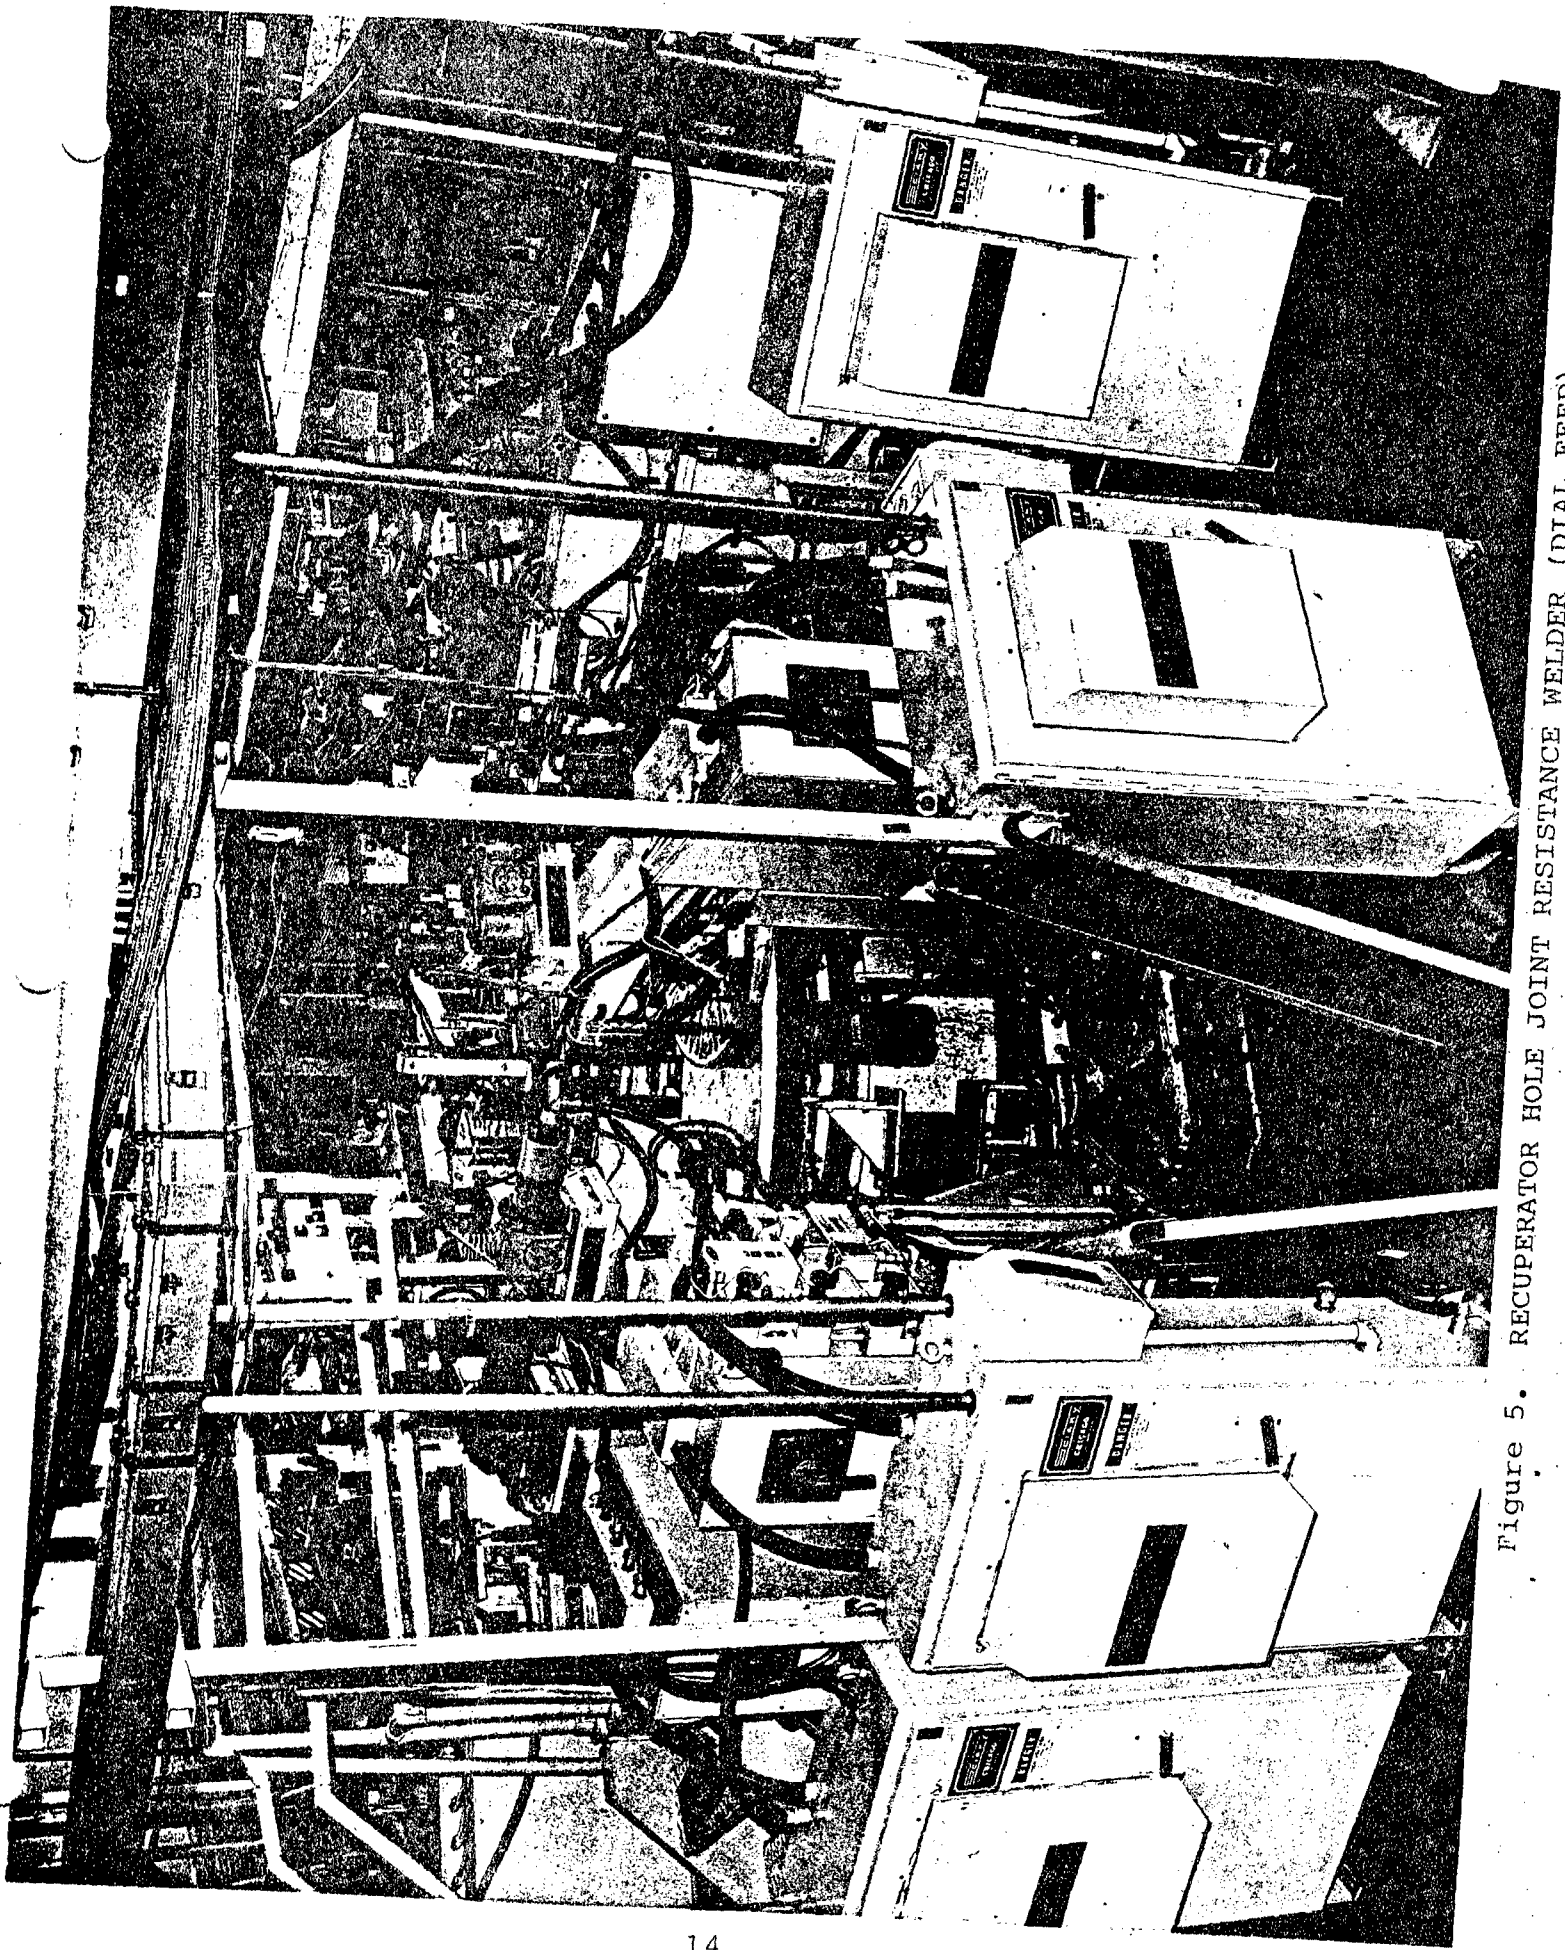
RECUPERATOR HOLE JOINT RESISTANCE WELDER (DIAL FEED)
